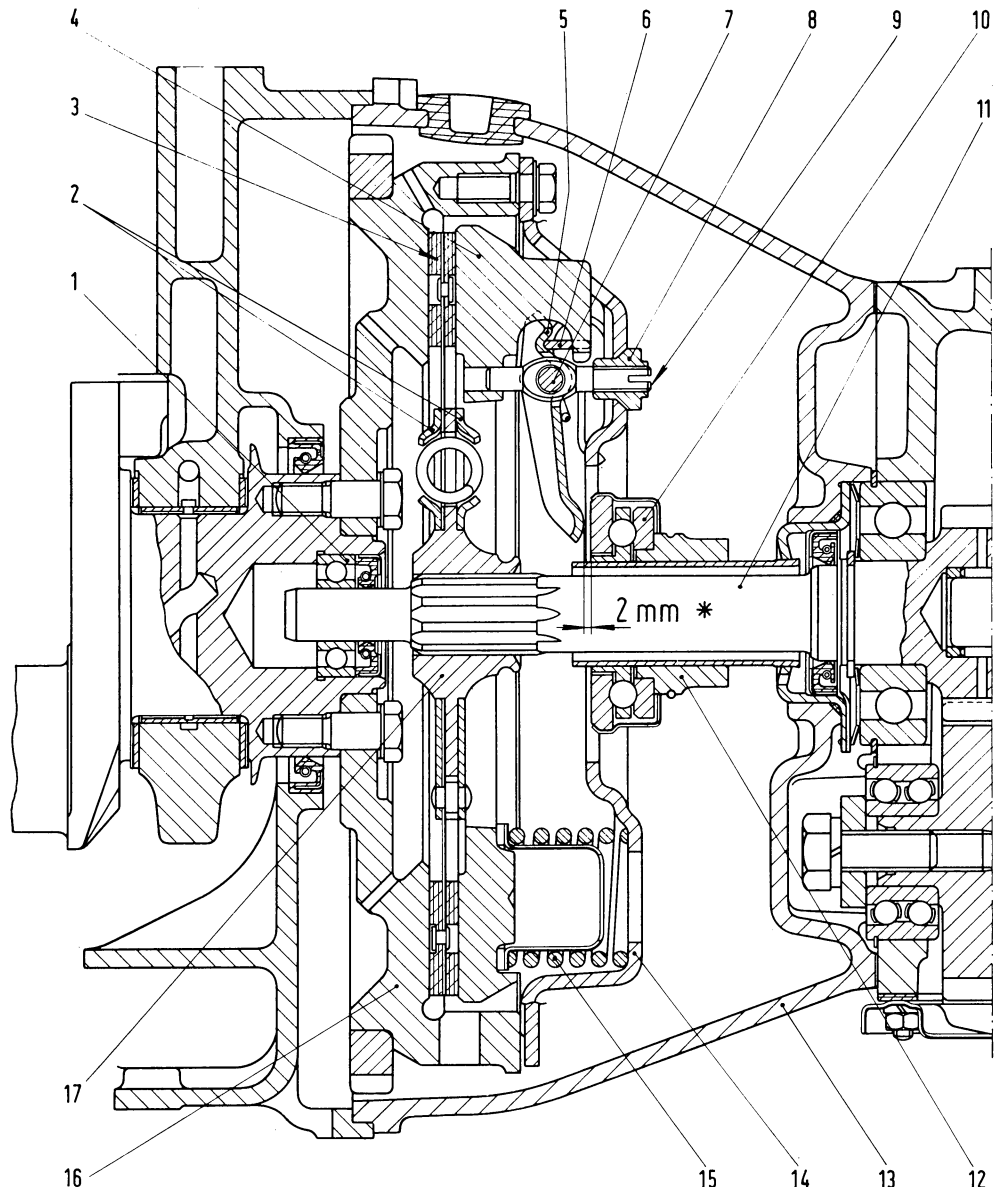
Side sectional view of 1600 S Cabriolet clutch assembly.
